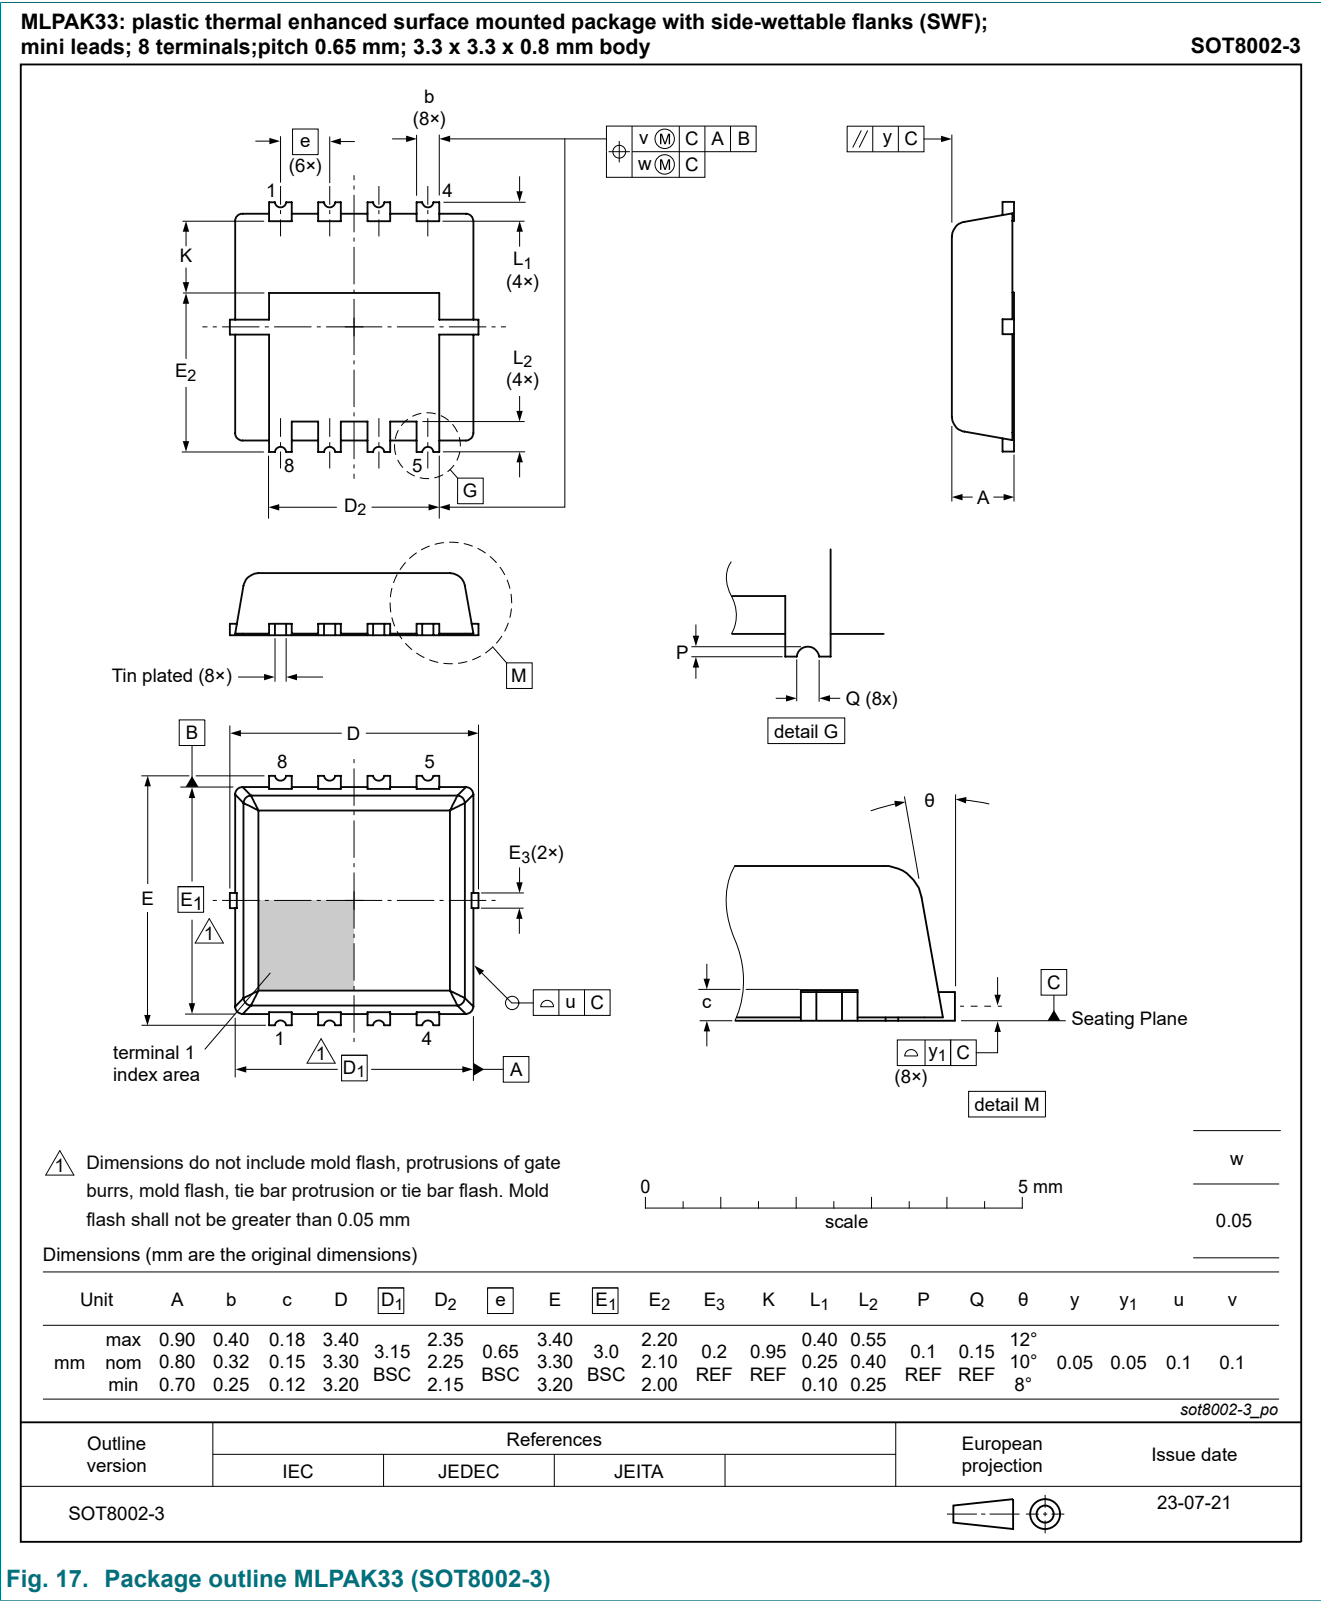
Package outline MLPAK33 (SOT8002-3)
